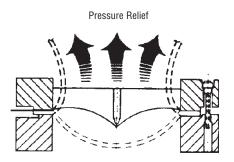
Pressure relief (disc cut open by knife blades)
